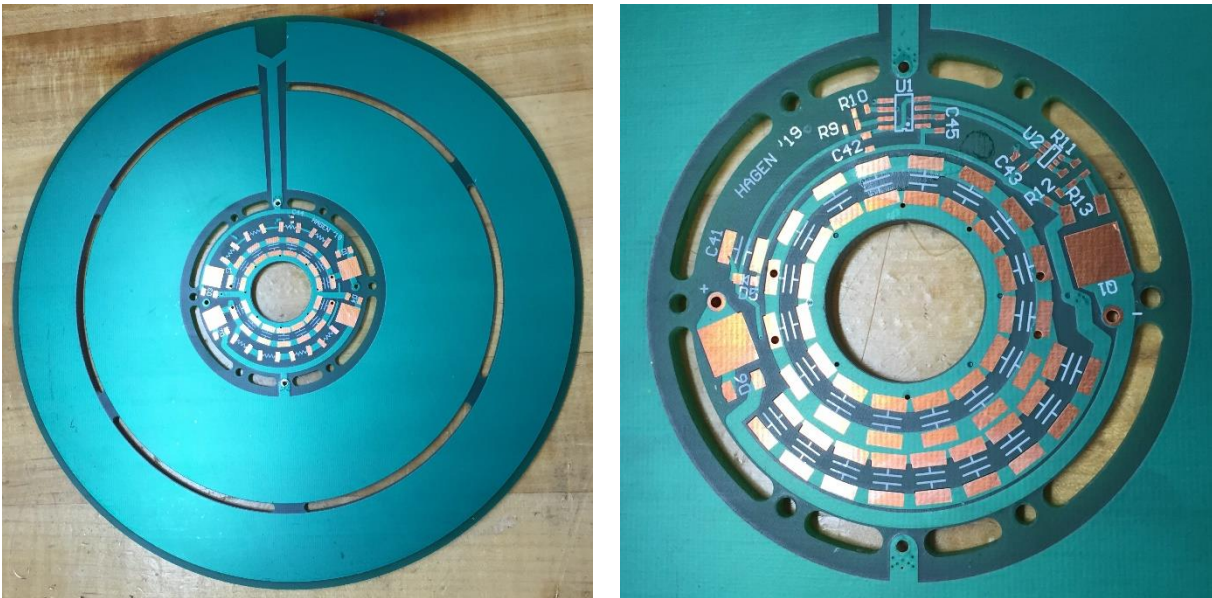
Printed circuit board coupler rotor, as received from the printed circuit board manufacturer. High frequency rectifier side (left) and close-up of rotor buck converter section (right).
